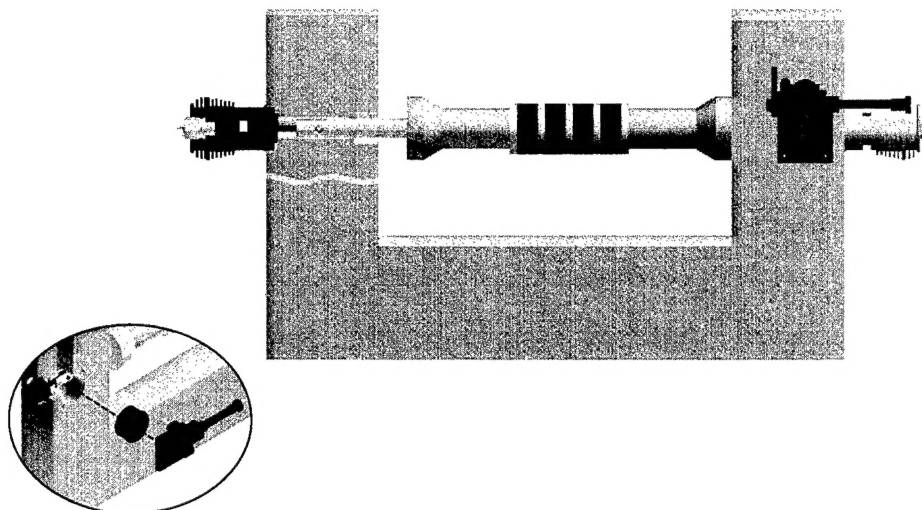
Lineal generator with coil removed. Insert shows carburetor reed valve assembly. Note frame "bumpers" on piston.
